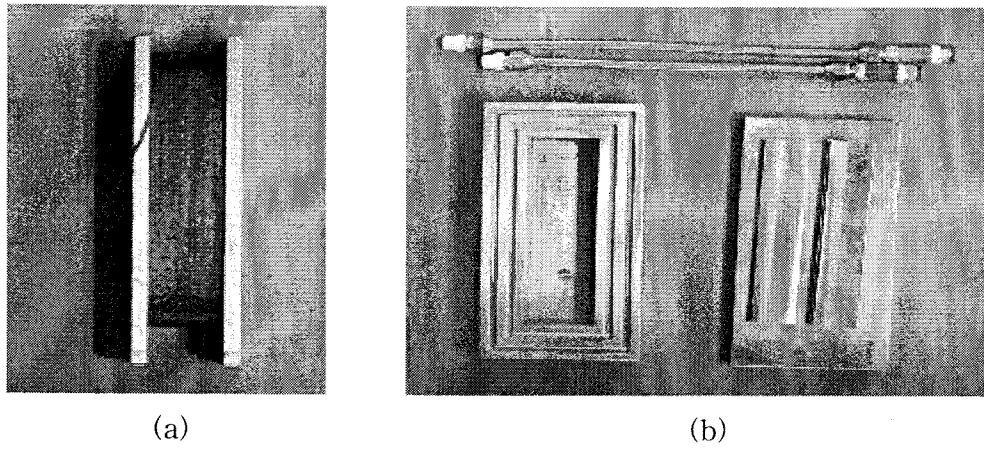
(a) Insert mold with twisted yarn; (b) RTM mold.
